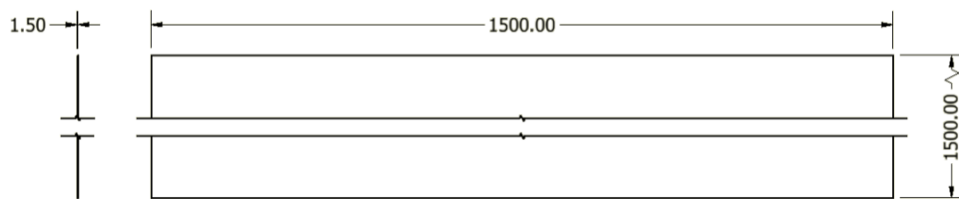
Workpiece dimensions (roll levelling models) (dimensions in mm).
